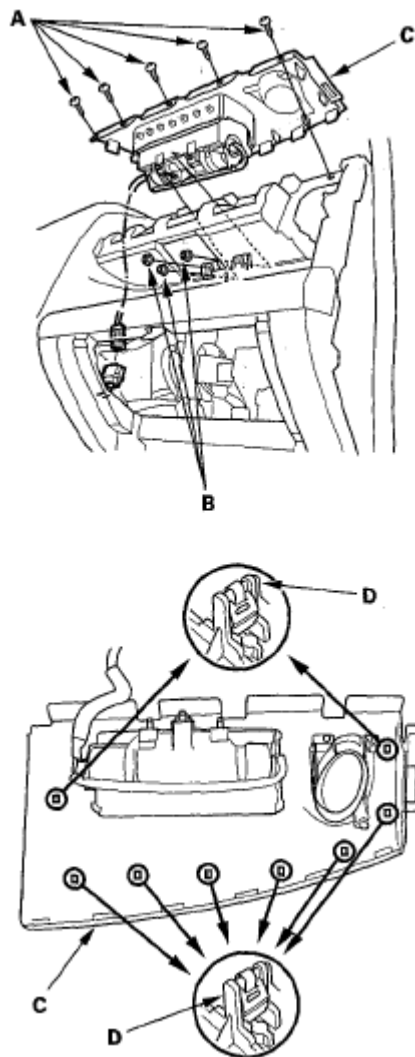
Identifying Front Passenger's Airbag Screws And Mounting Nuts
